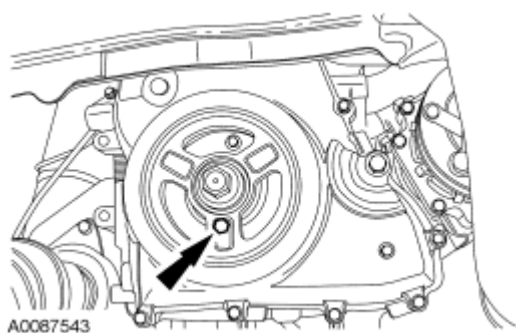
Aligning Crankshaft Pulley Bolt Holes
